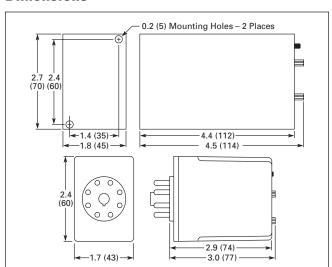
Surface-Mount and Plug-In — Approximate Dimensions in Inches (mm)
